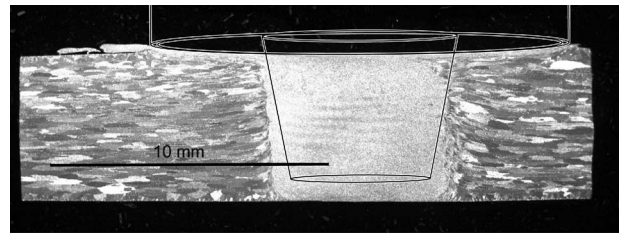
Macrograph of weld cross section (AA 5083-H111 etched with modified Poulton's reagent) with superimposed tool profile
